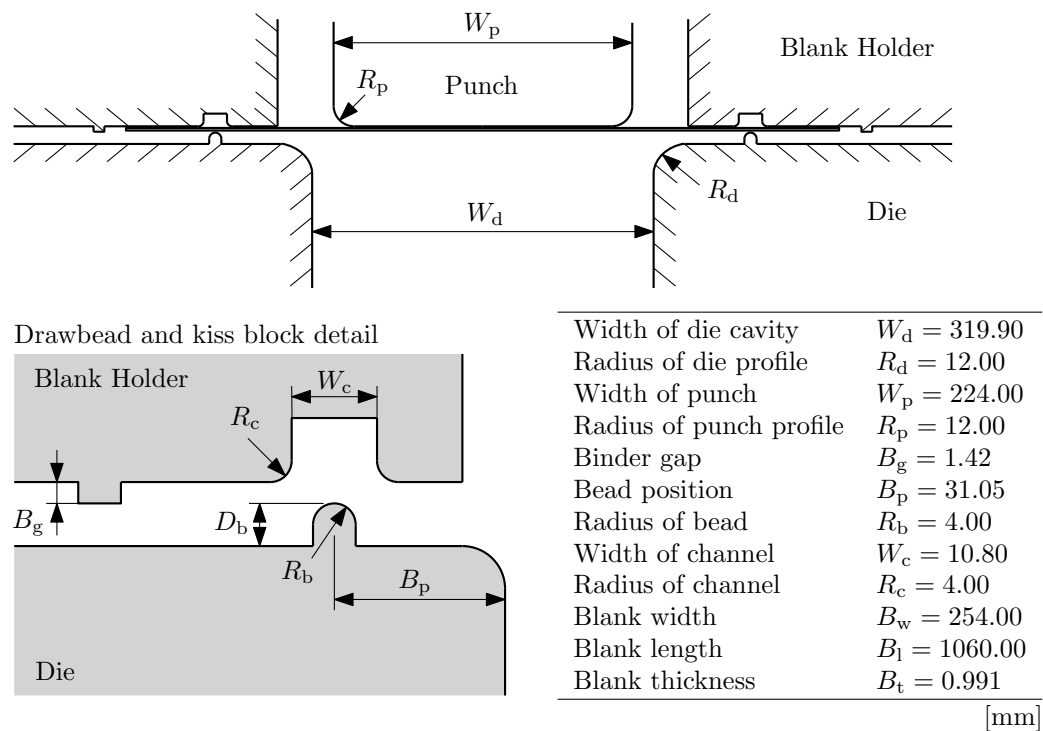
U-channel forming with drawbeads - Scheme of the drawing process.
